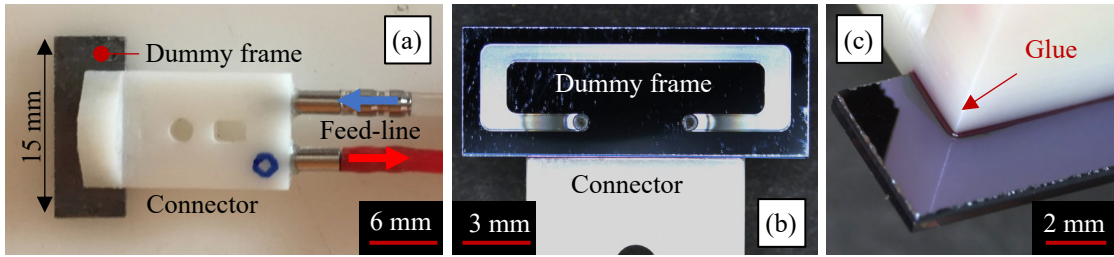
Details of the connector assembled with the dummy frame. (a) glued connector, (b) view of the dummy frame circuit from the glass cover and (b) detail of the glued interface.
